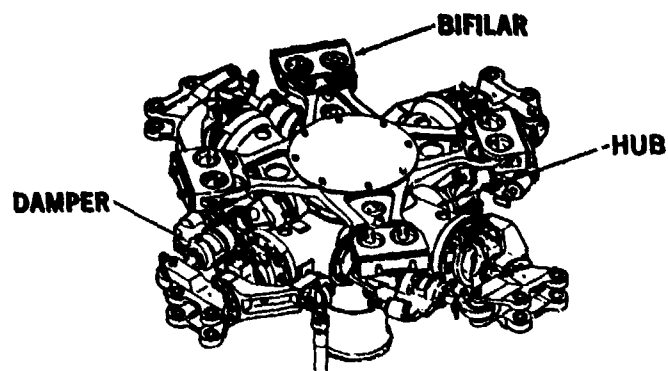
ROTOR HEAD OF SIKORSKY UH-60A
